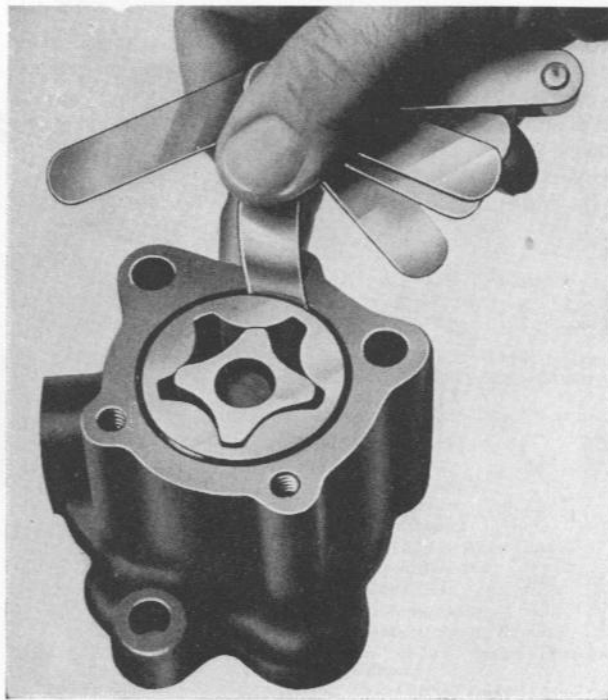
CHECKING OUTER ROTOR TO OIL PUMP BODY
